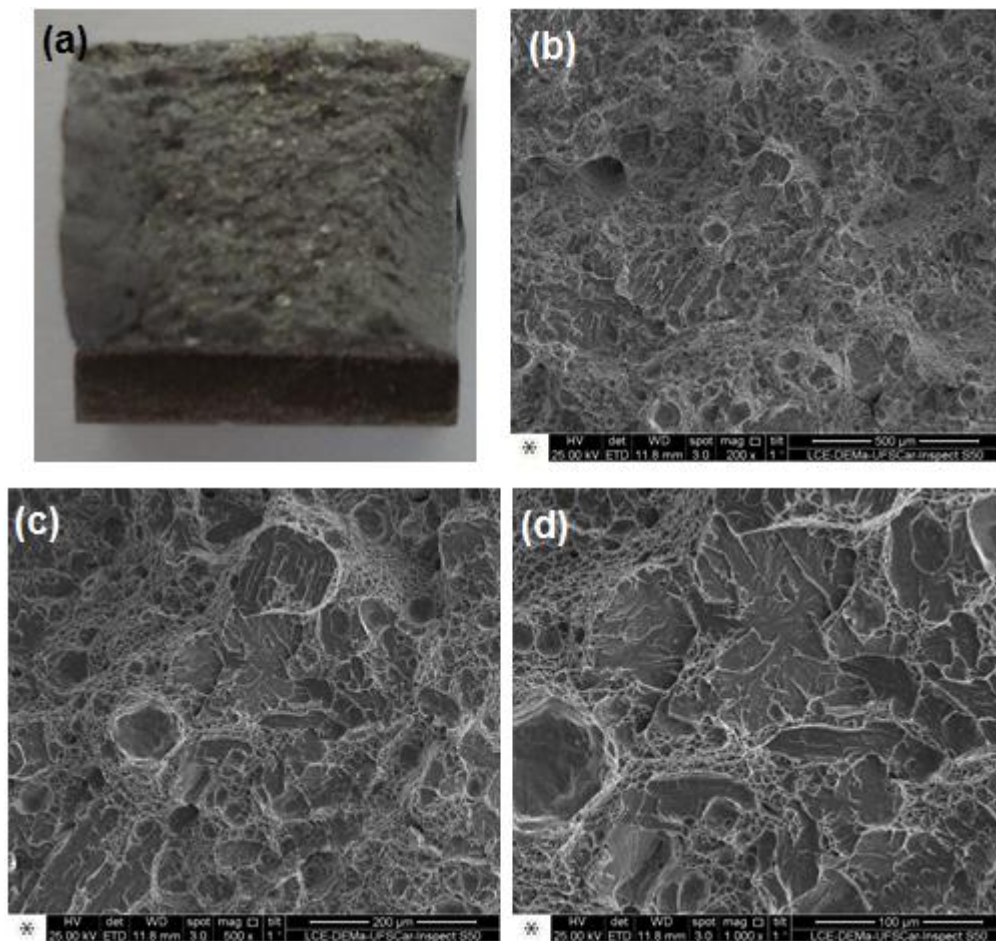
(a) Photography of the Charpy-V fracture surface and (b), (c) and (d) mixed cleavage/dimple fracture surface of the as-spray formed SMSS.
